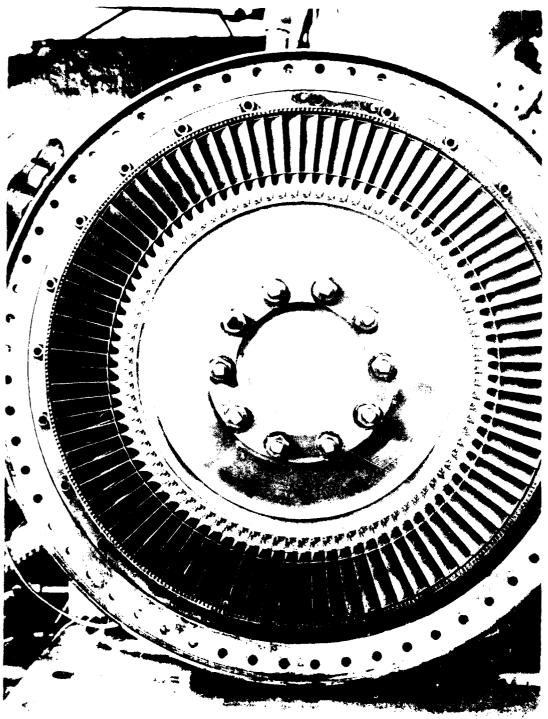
View of E3 Second Stage Wheel Test Series of Cover Removed (1975) - Cover Remove
